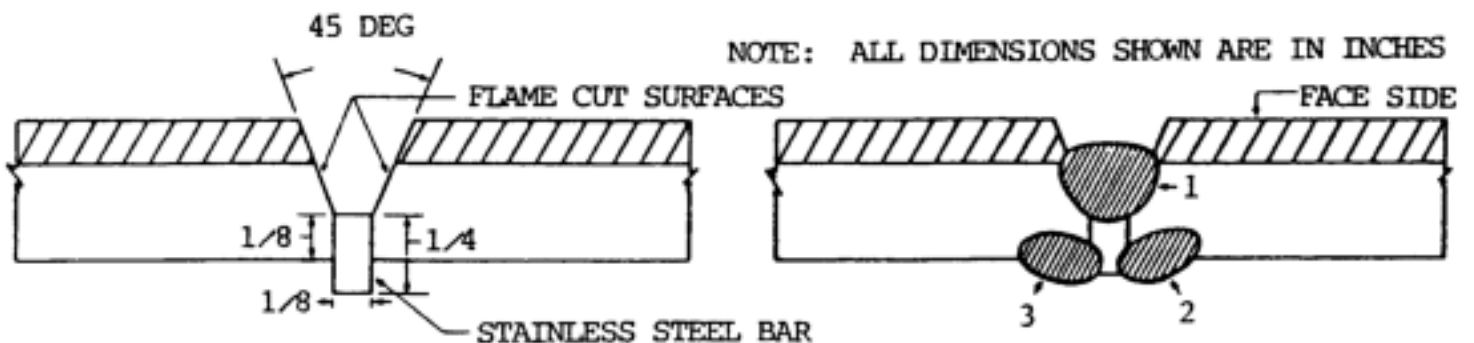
Procedure for welding face hardened armor up to 1/2-in., using the depressed joint method.
